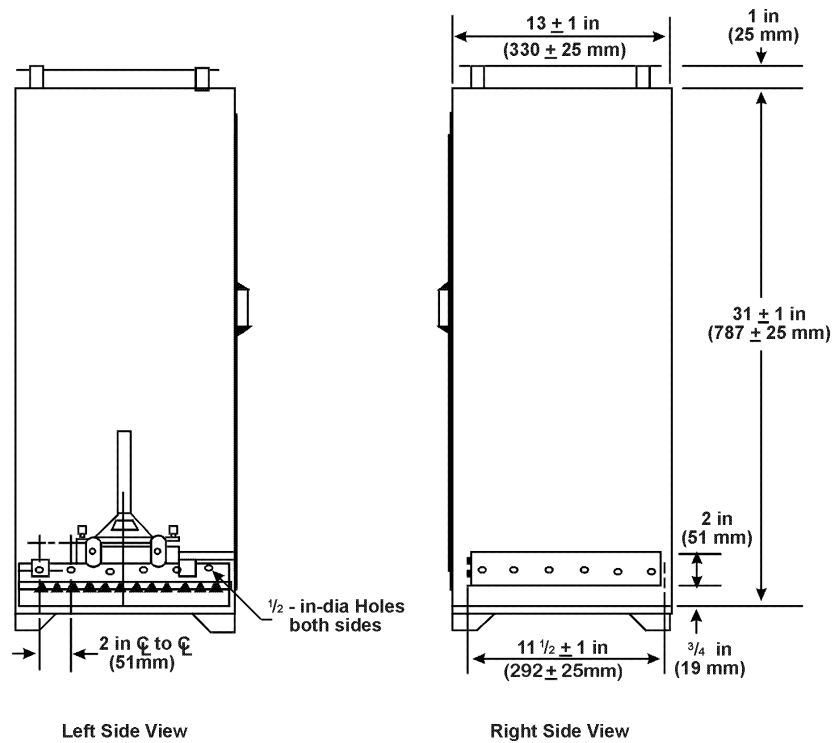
Side Views of Bunsen Burner Test Cabinet
